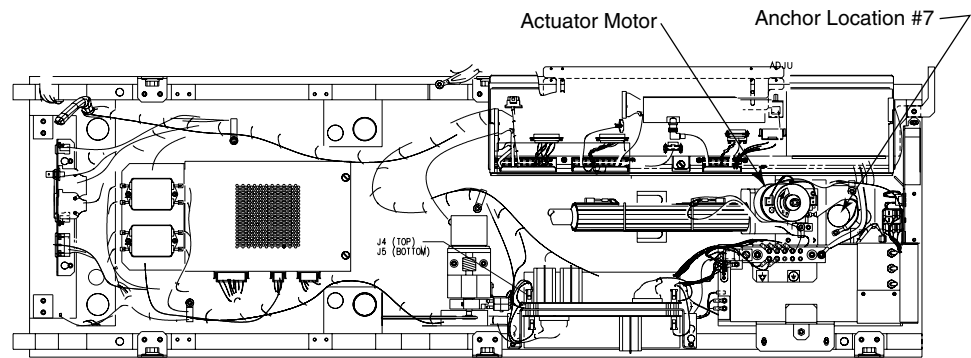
Table Assembly Showing Actuator Motor and Anchor Location #7
